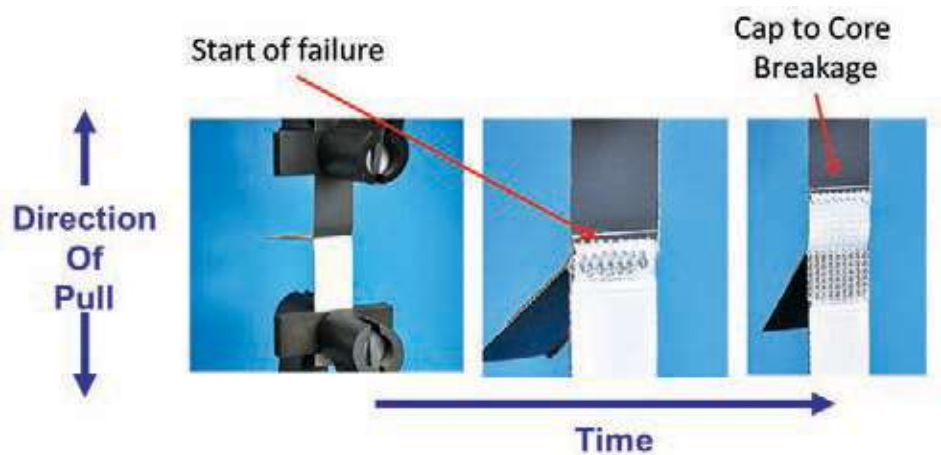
Illustration of the ply adhesion test and a full film tearing bond, indicating a complete weld.
